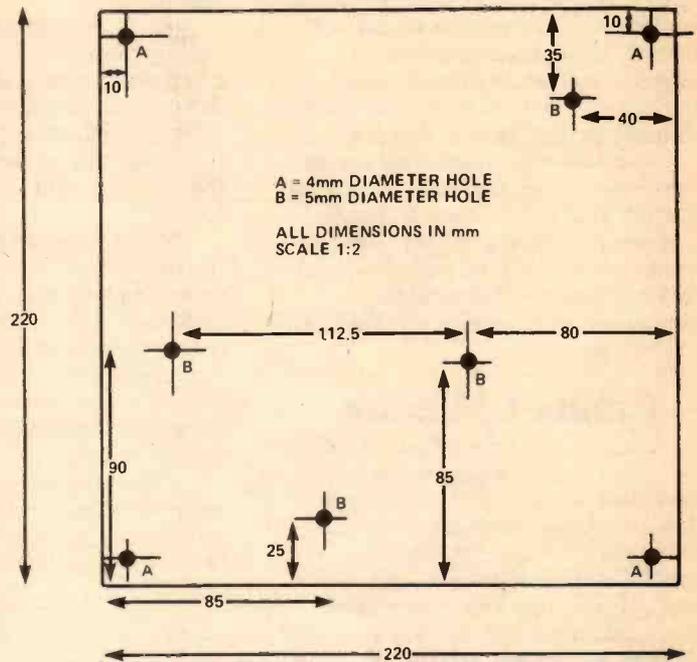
This diagram shows the drilling positions for the choke and mounting screwholes on the crossover panel.
